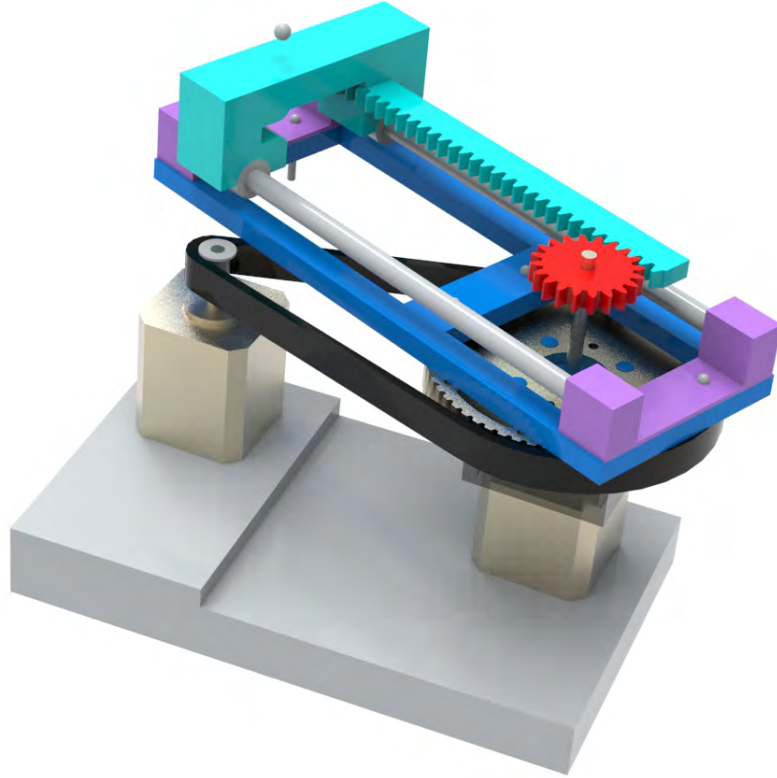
Finished CAD assembly in Solid Edge. [1]
